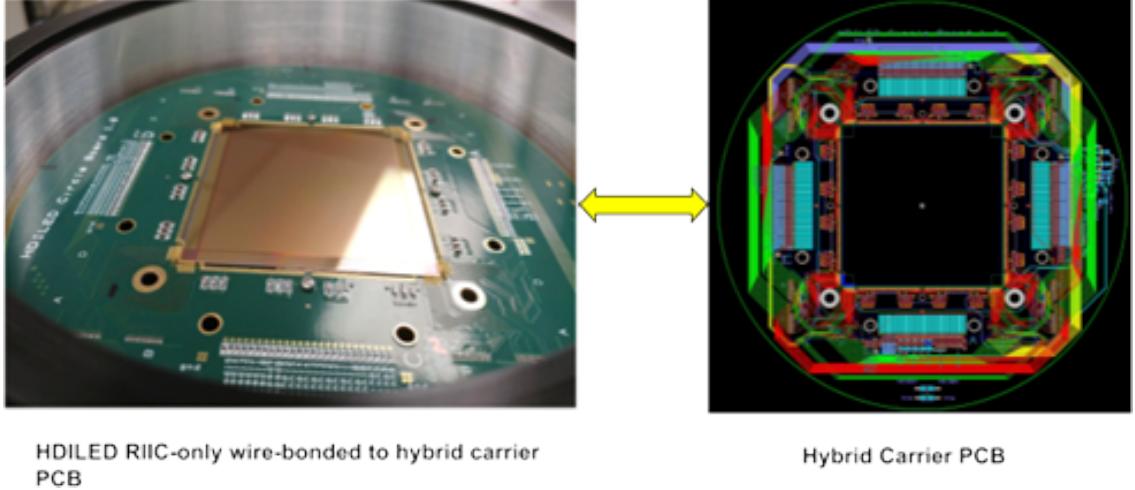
Photograph of RIIC-only wire-bonded to hybrid carrier PCB(left) and PCB layout of carrier PCB board used(right)[10].
